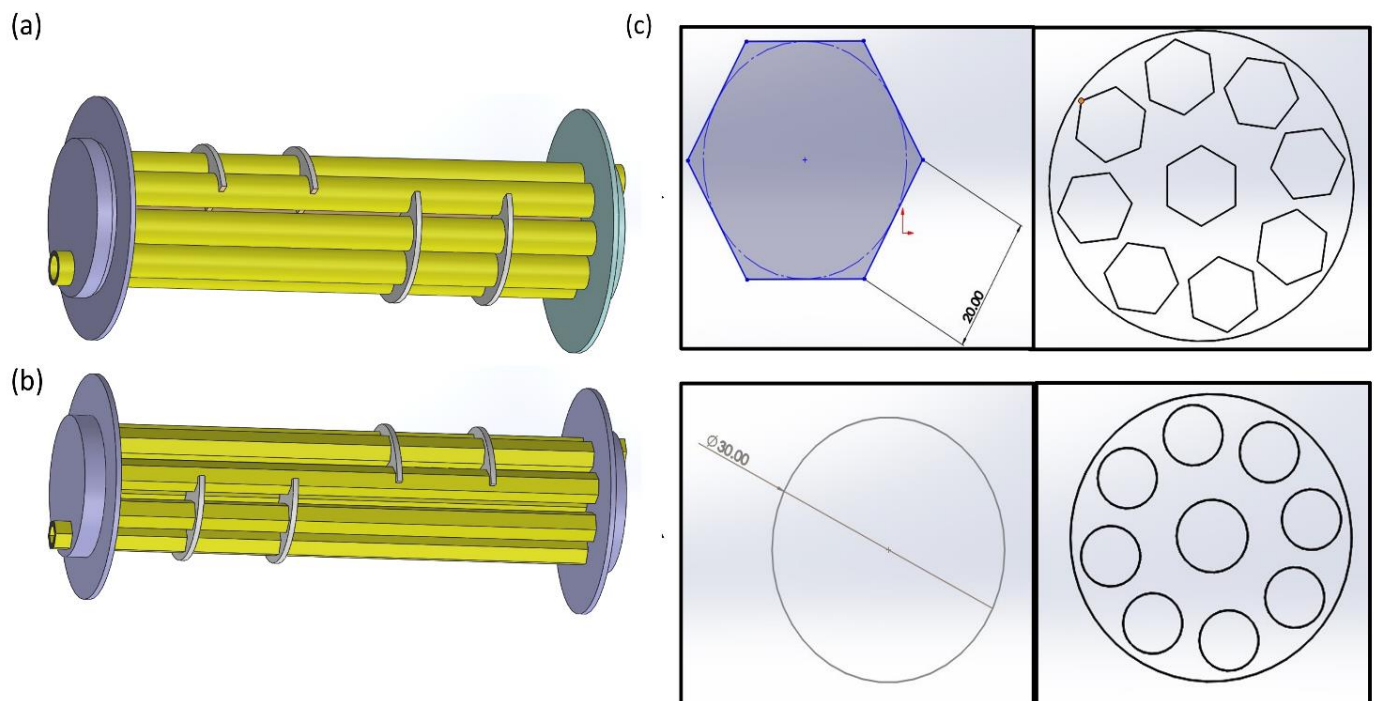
(a) Round tubes heat exchanger; (b) designed hexagonal tubes heat exchanger; (c) cross-sectional view of tubes for hexagonal and round shapes.
